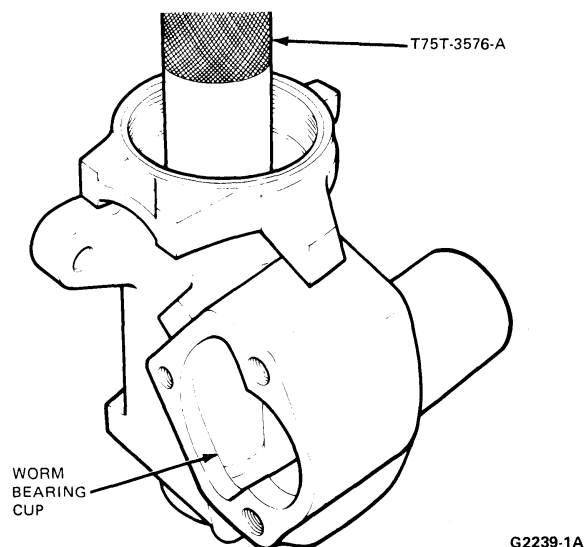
Installing Wormshaft Upper Bearing Cup in Housing
